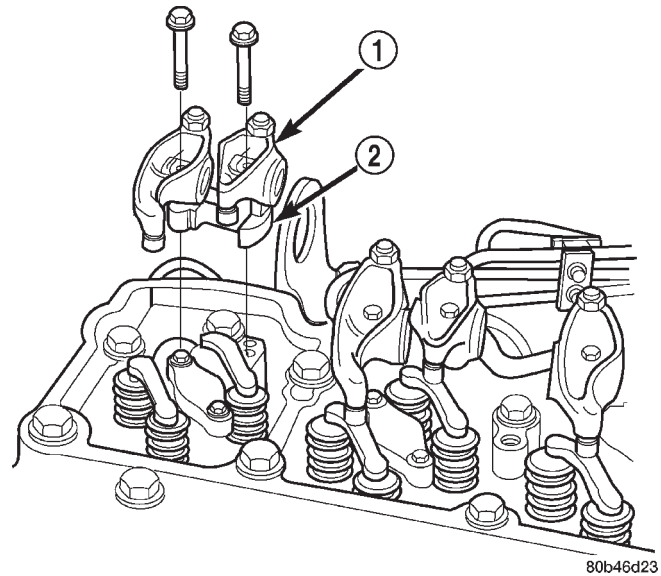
Rocker Arms and Pedestals—Removal/Installation
